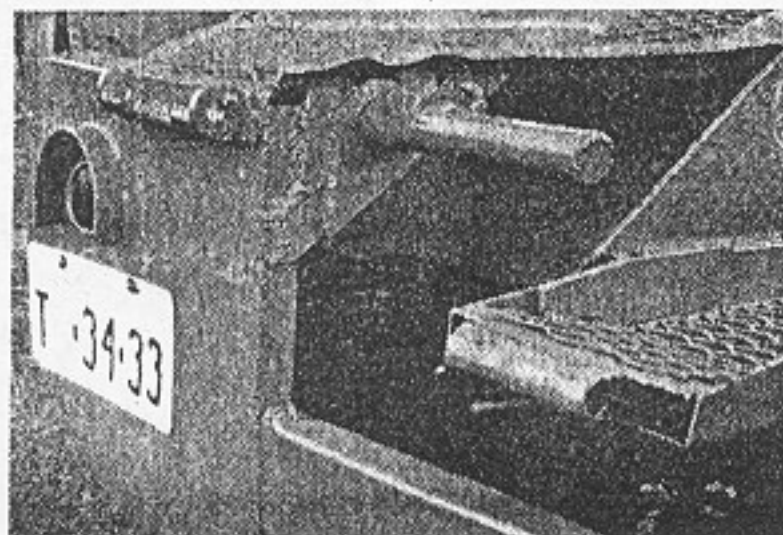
Vertical welds on bumper of transport trailer.
